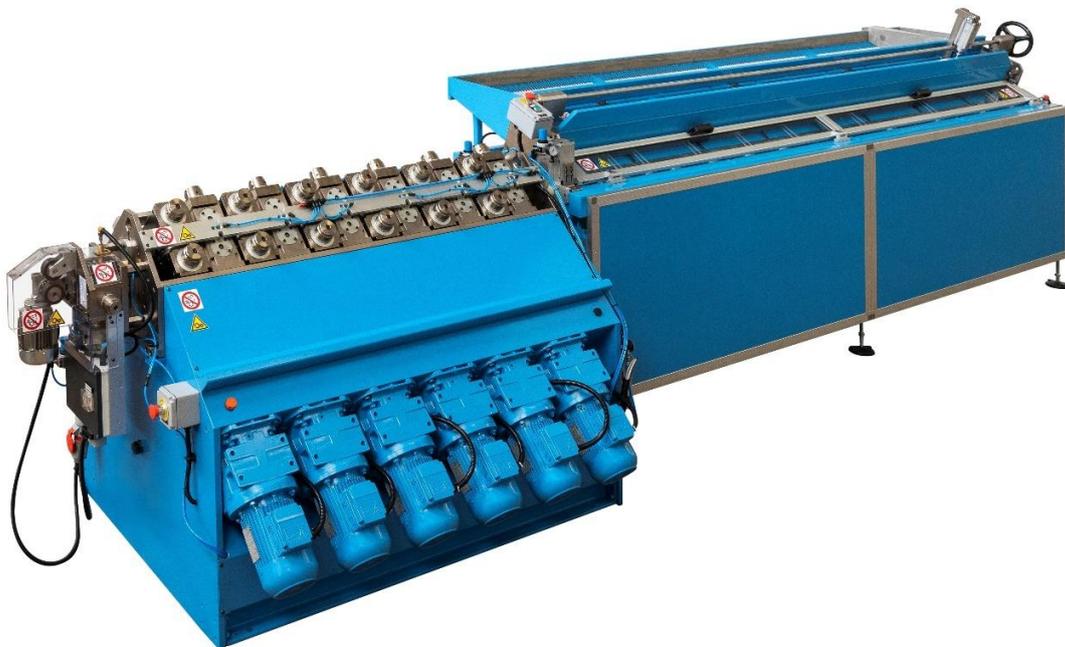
12-stand roll reducing mill with lubricating system, marking system and table feeder
